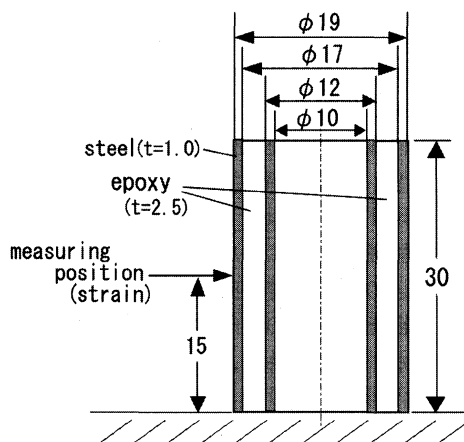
Cross-Sectional View of Test Pieces in Experiments (unit : mm)
